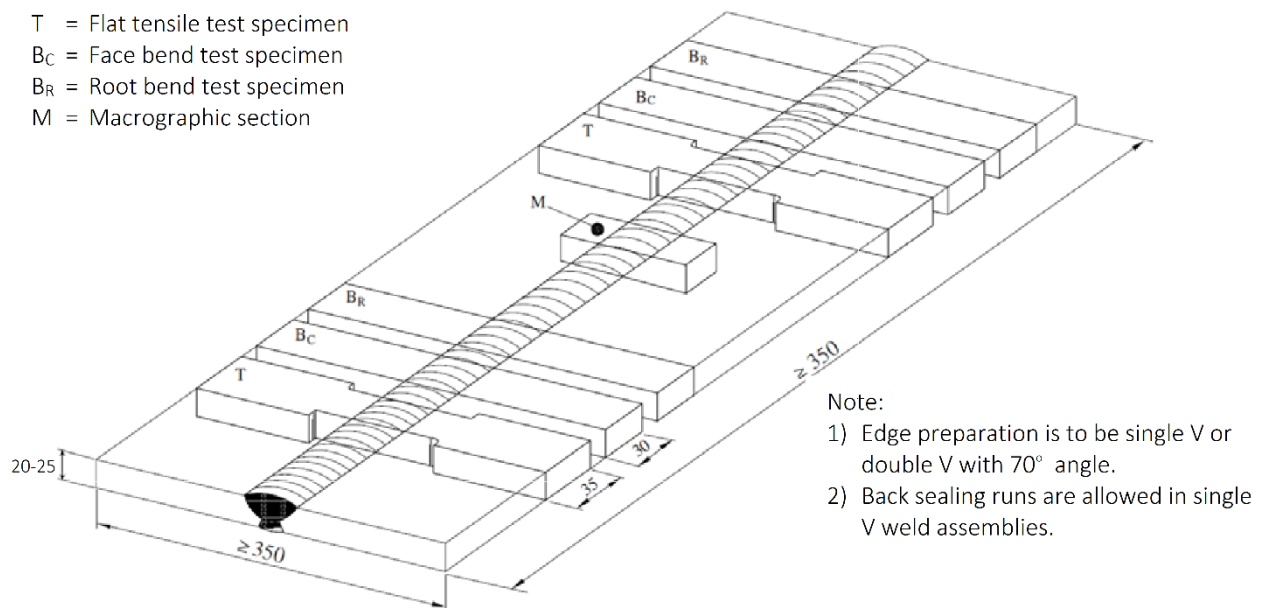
Additional butt-weld test piece in downhand position
